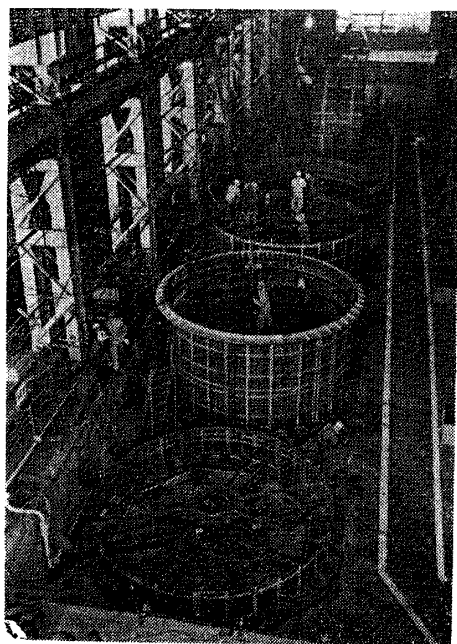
A view of fabricating unit cylinders in shop. In the inner part of shop submerged-arc welding of longitudinal joint is being performed.
